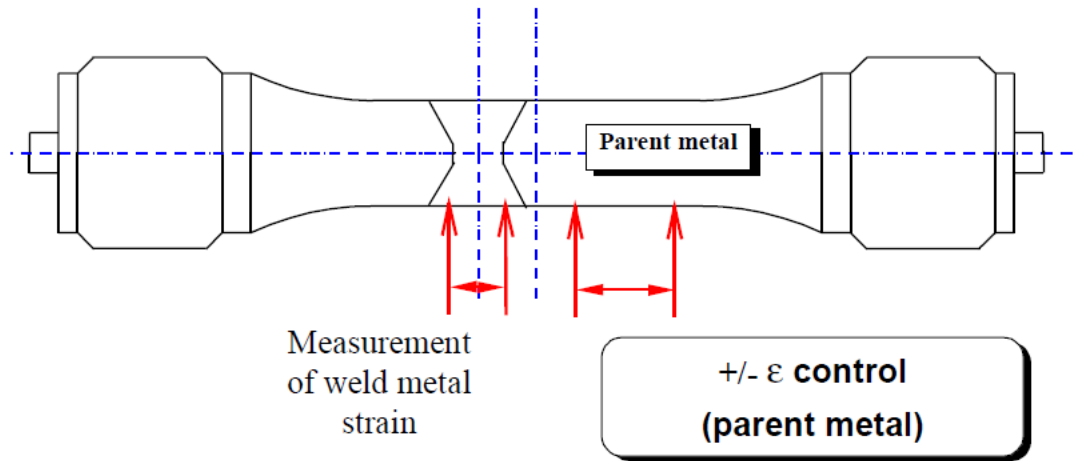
Control of welded joint specimen tests (Madi et al., 2004)
